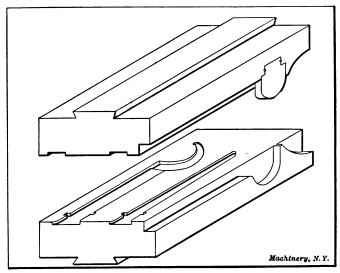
Drop-forging Dies for Making a Long Forging by Halves, to Obviate the Necessity of Large Dies
